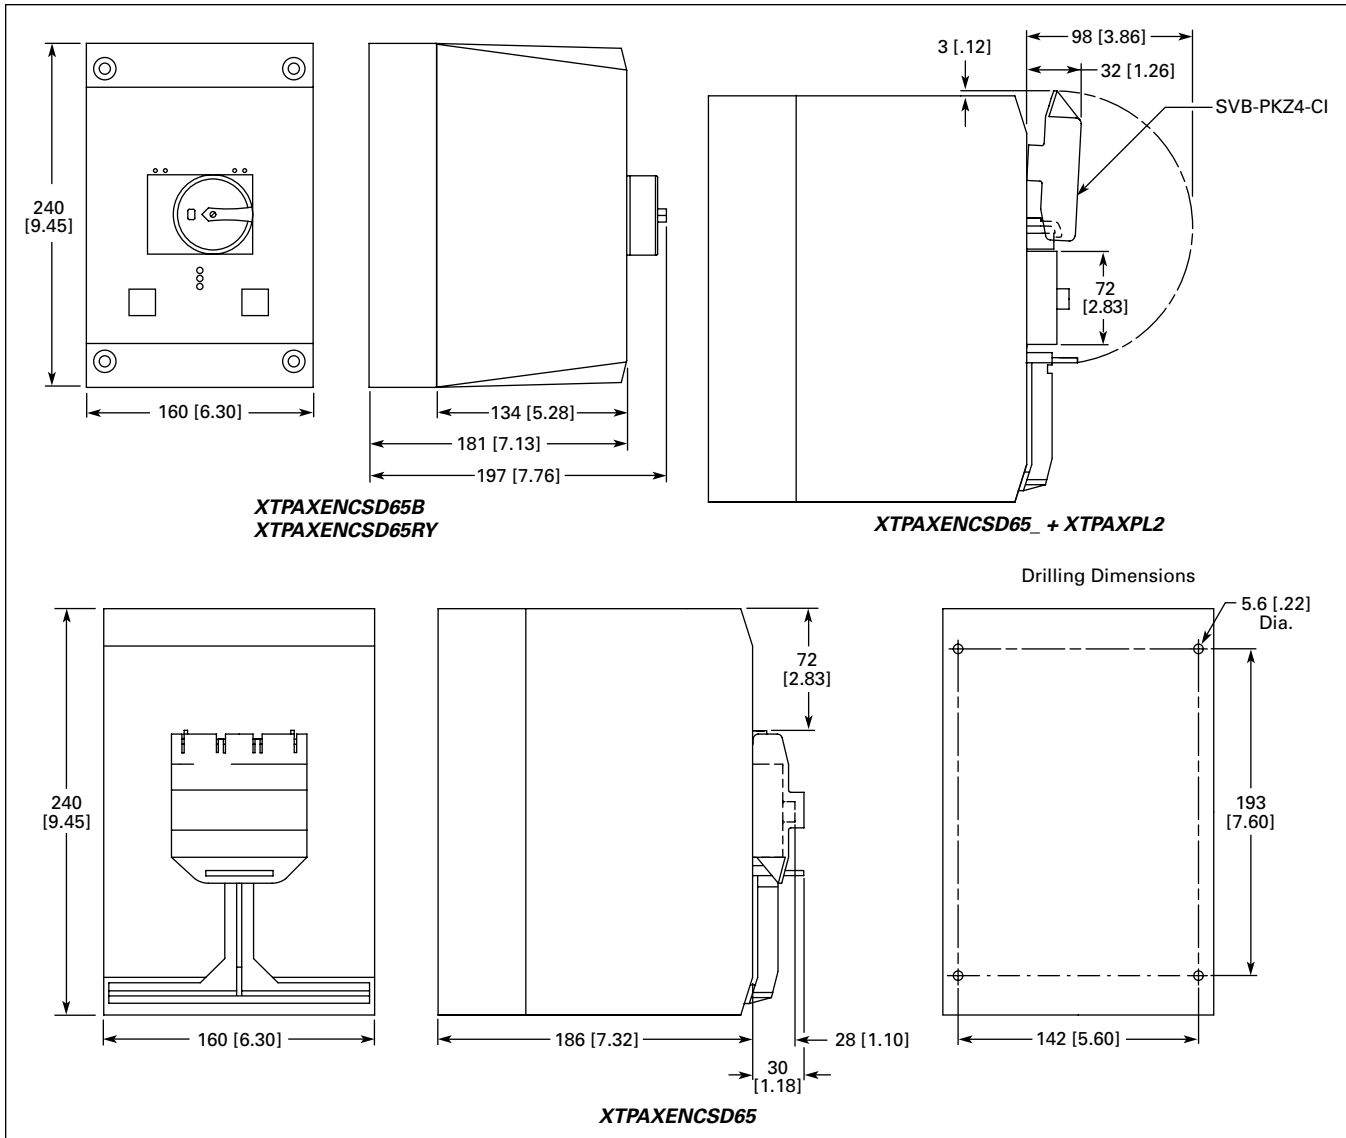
Insulated Enclosures for Surface Mounting of XTPR...D Manual Motor Protectors (Approximate Dimensions in mm [in])
